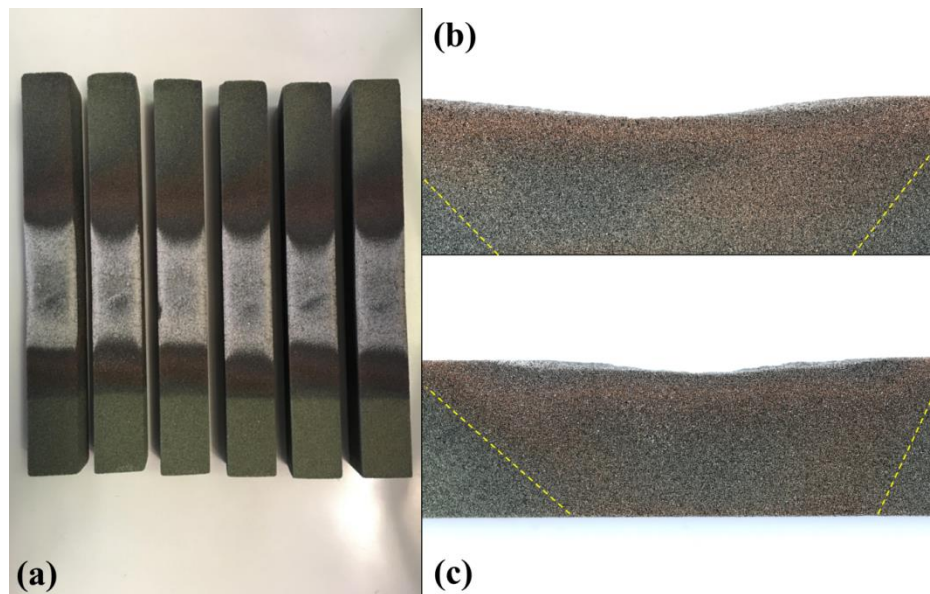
Bar specimens used form thermal deformation testing, (b) zoomed view of LB specimen, and (d) zoomed view of HB specimen
